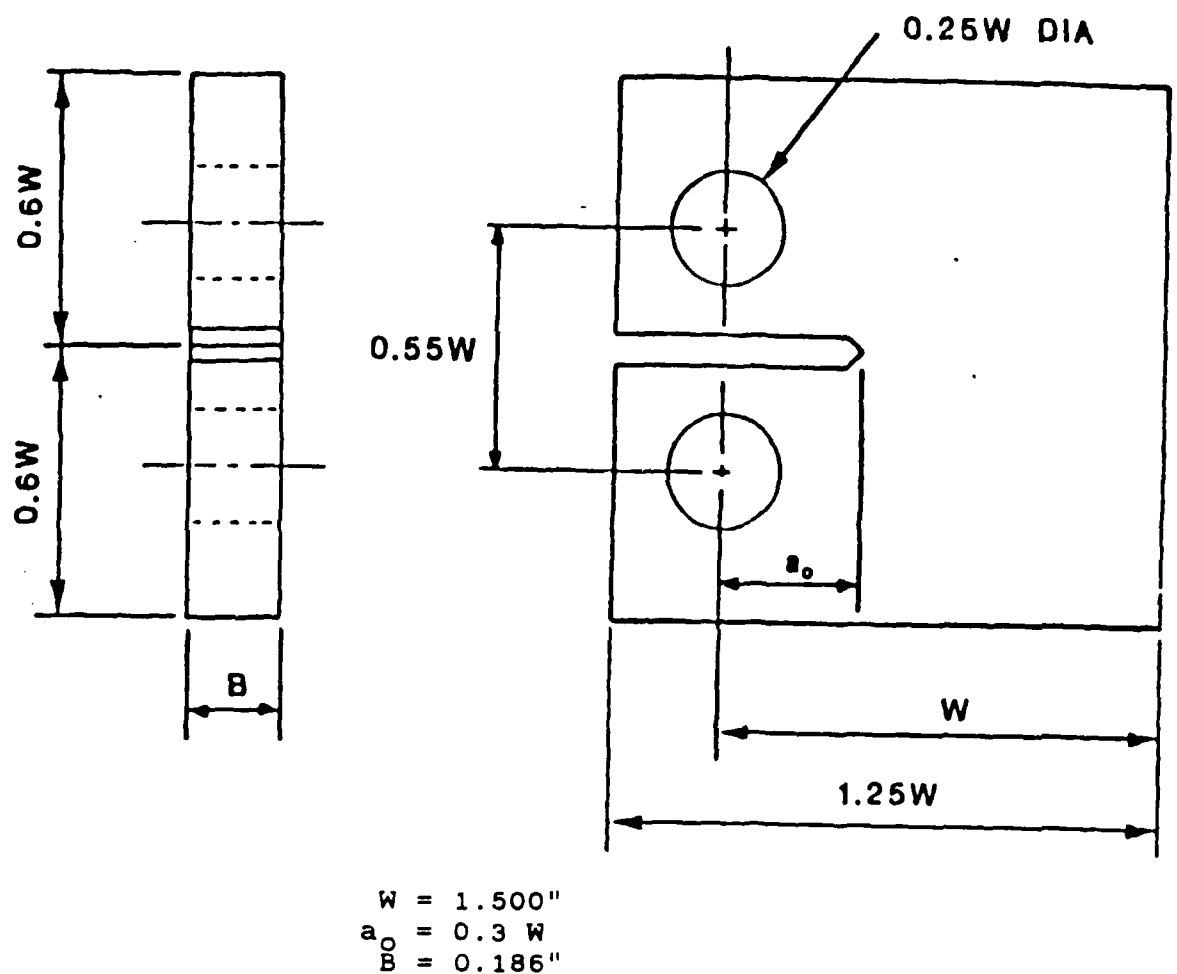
Standard ASTM fatigue crack propagation specimen.
